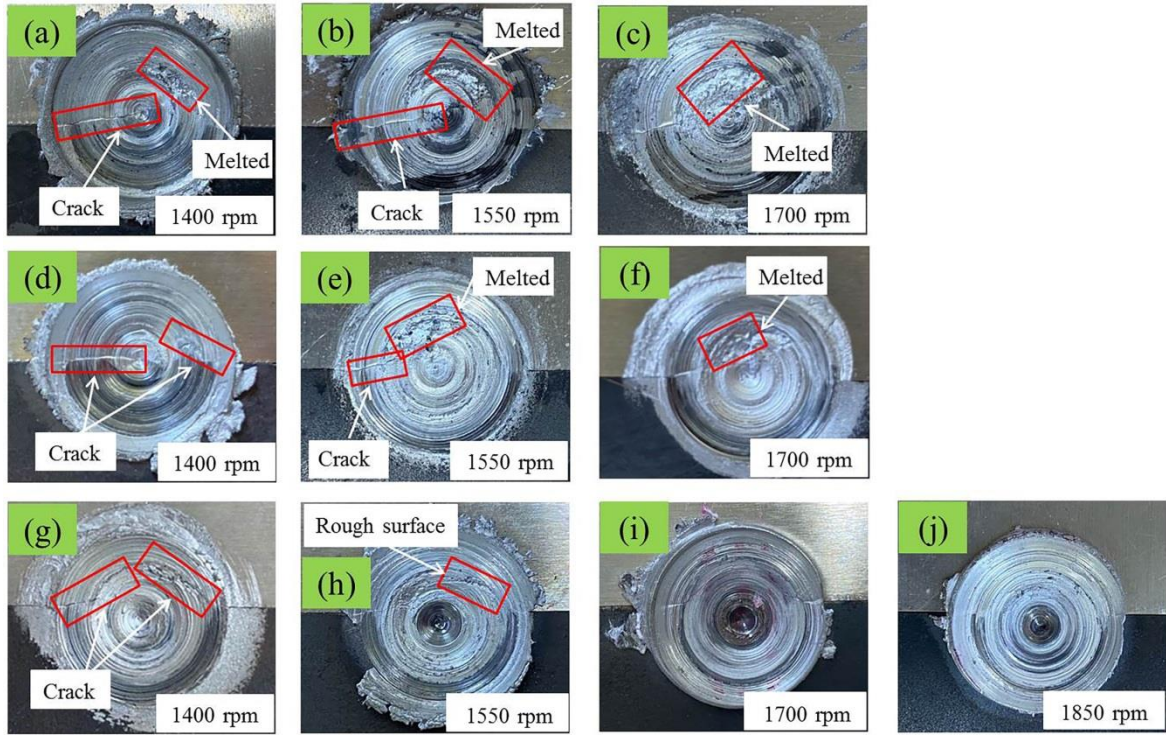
FSSW joints: (a-c) tool offset 1.5 mm toward the AA6061-T6 side, (d-f) no offset, and (g-j) tool offset 1.5 mm toward the S45C steel side
